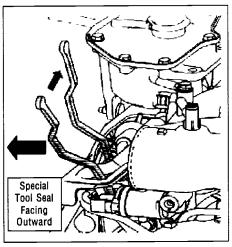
Insertion of Special Tool through the upper opening for Rear Bolt (RH)
